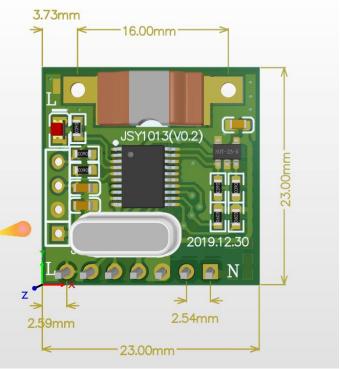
JSY1013 Electrical Parameter Sensor Dimensional Drawing
